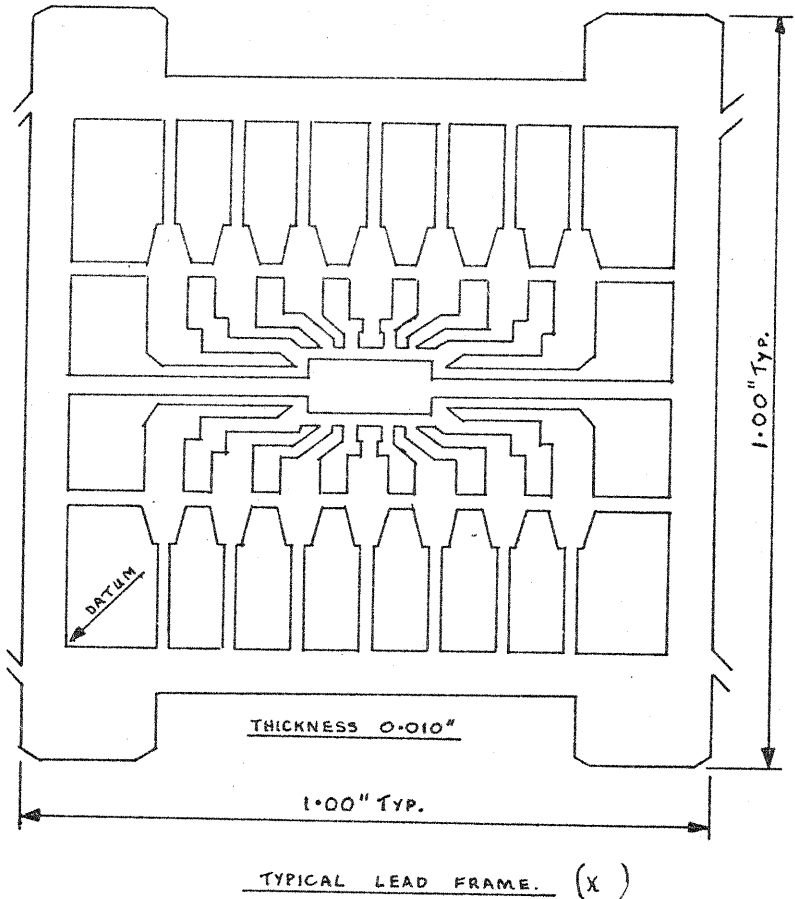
DRAWING OF DETAIL OF LEAD FRAME
